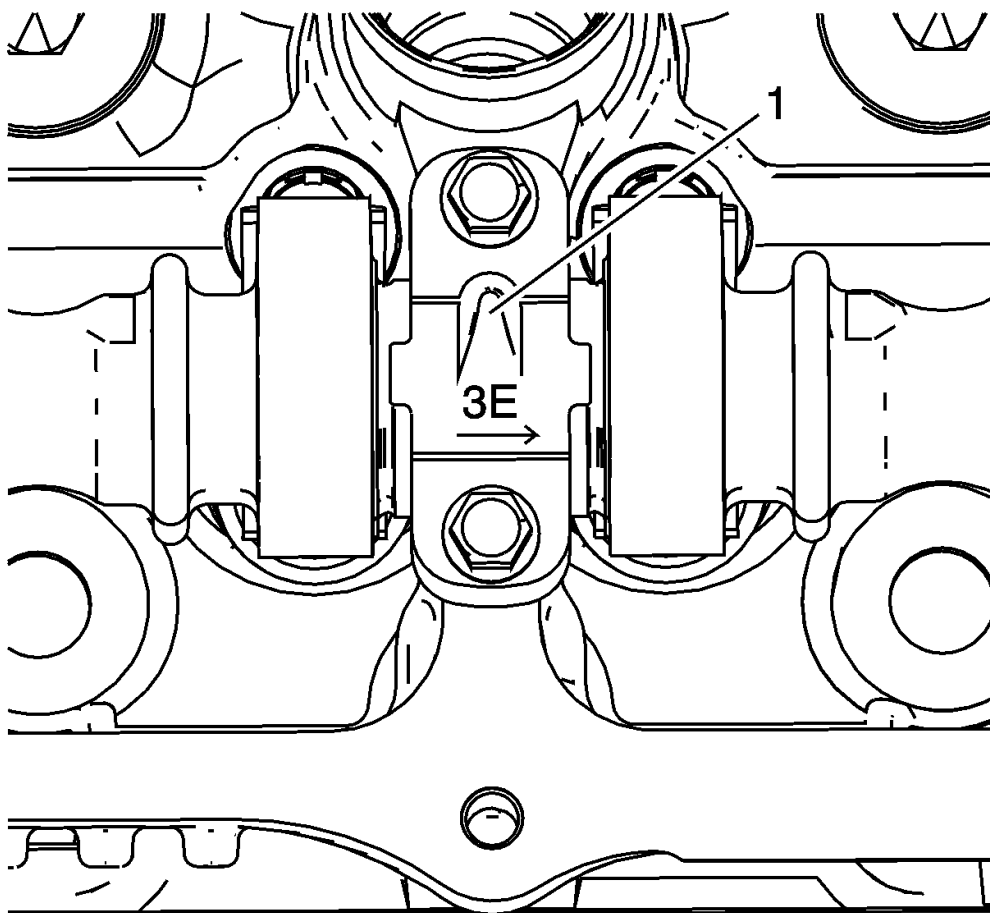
Right Cylinder Head Camshaft Bearing Cap Markings
